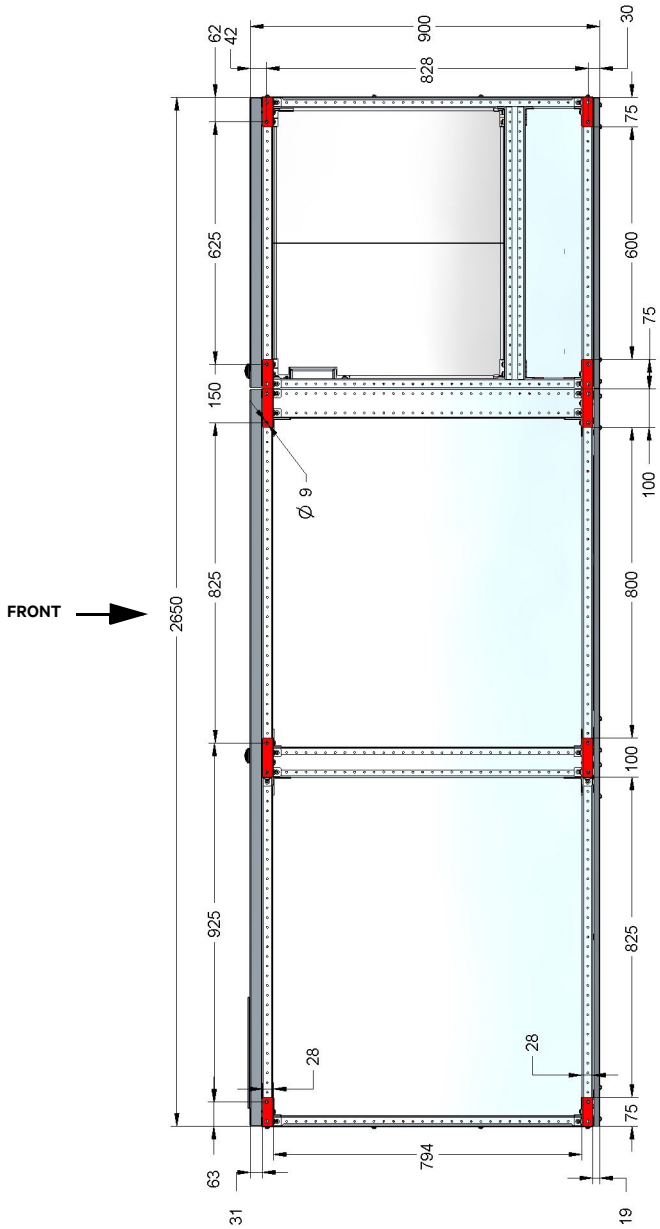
Liebert EXL S1 1000/1200kVA bottom view (footprint and floor mounting holes)
